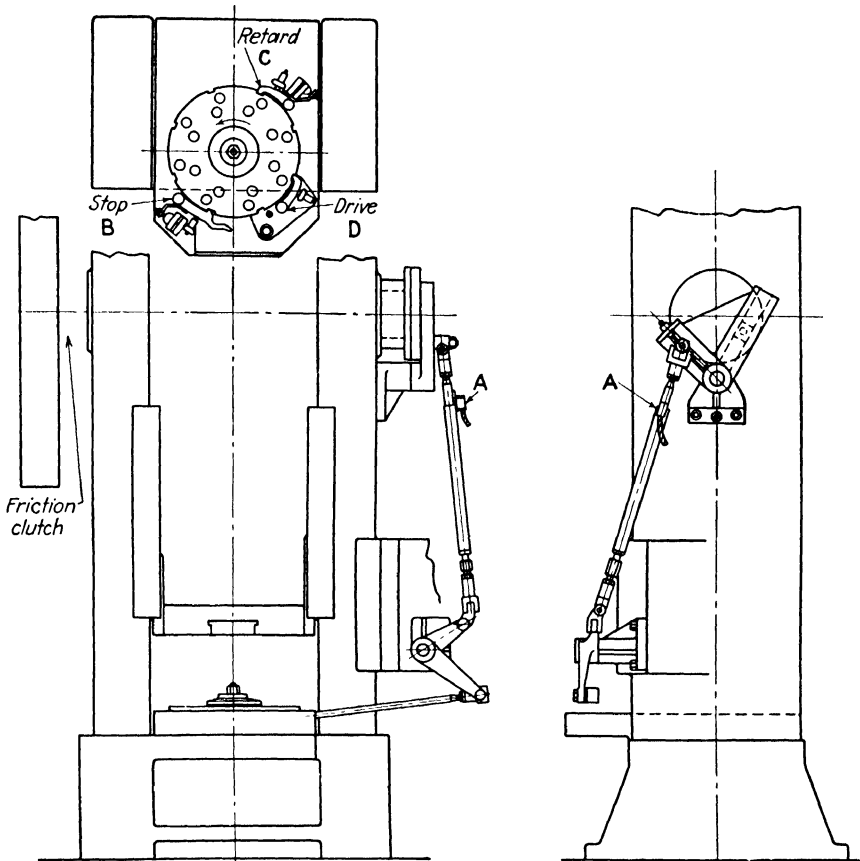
A typical dial-feeding mechanism showing the stop with retarding and driving pawls in place. The driving-crank disk, the bell crank, the operating arms, and the adjustable thrust rods are also shown. (Courtesy of F. J. Littell Machine Co.)
